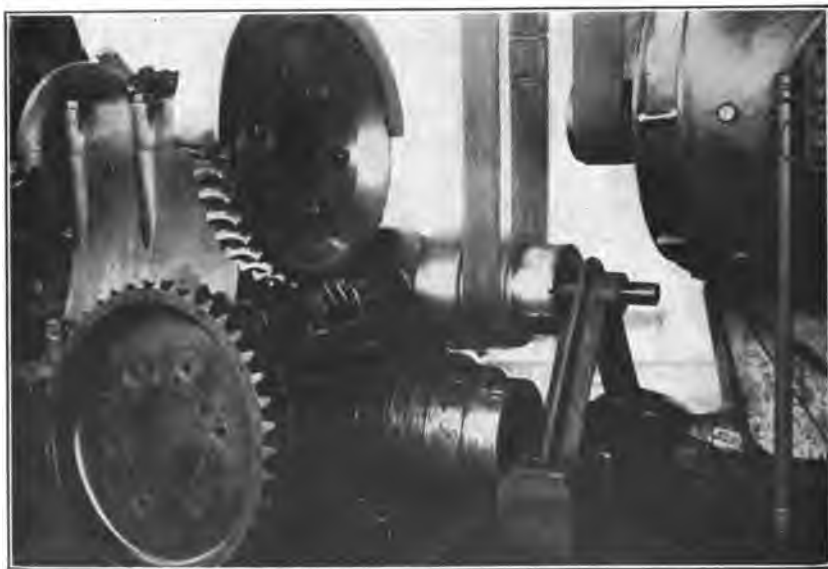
BRONZE WORM GEAR THAT TOOK THE PLACE OF A CAST-IRON GEAR WHICH FAILED UNDER THE HEAVY SERVICE OF HIGH-SPEED TOOLS.
